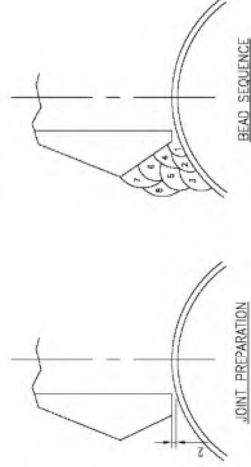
Alignment and welding practices for branch nozzle with O-let fitting
